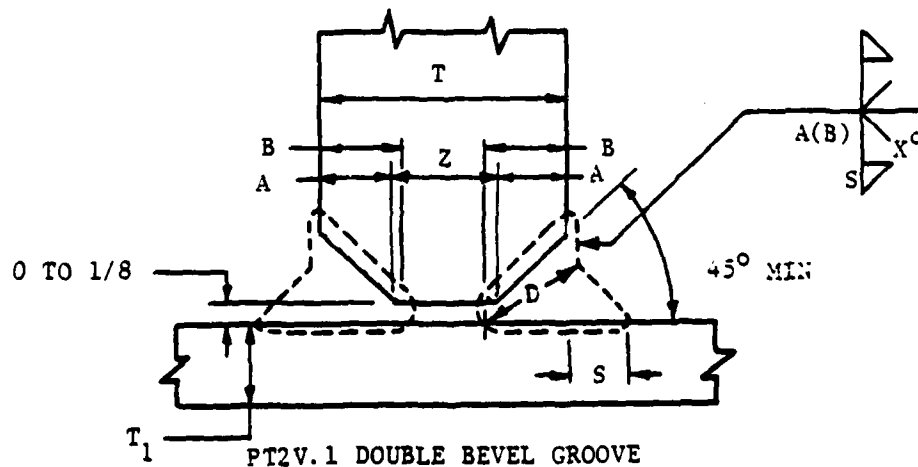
Partial Penetration Tee Joint, Double Bevel, Fillet Reinforced.
